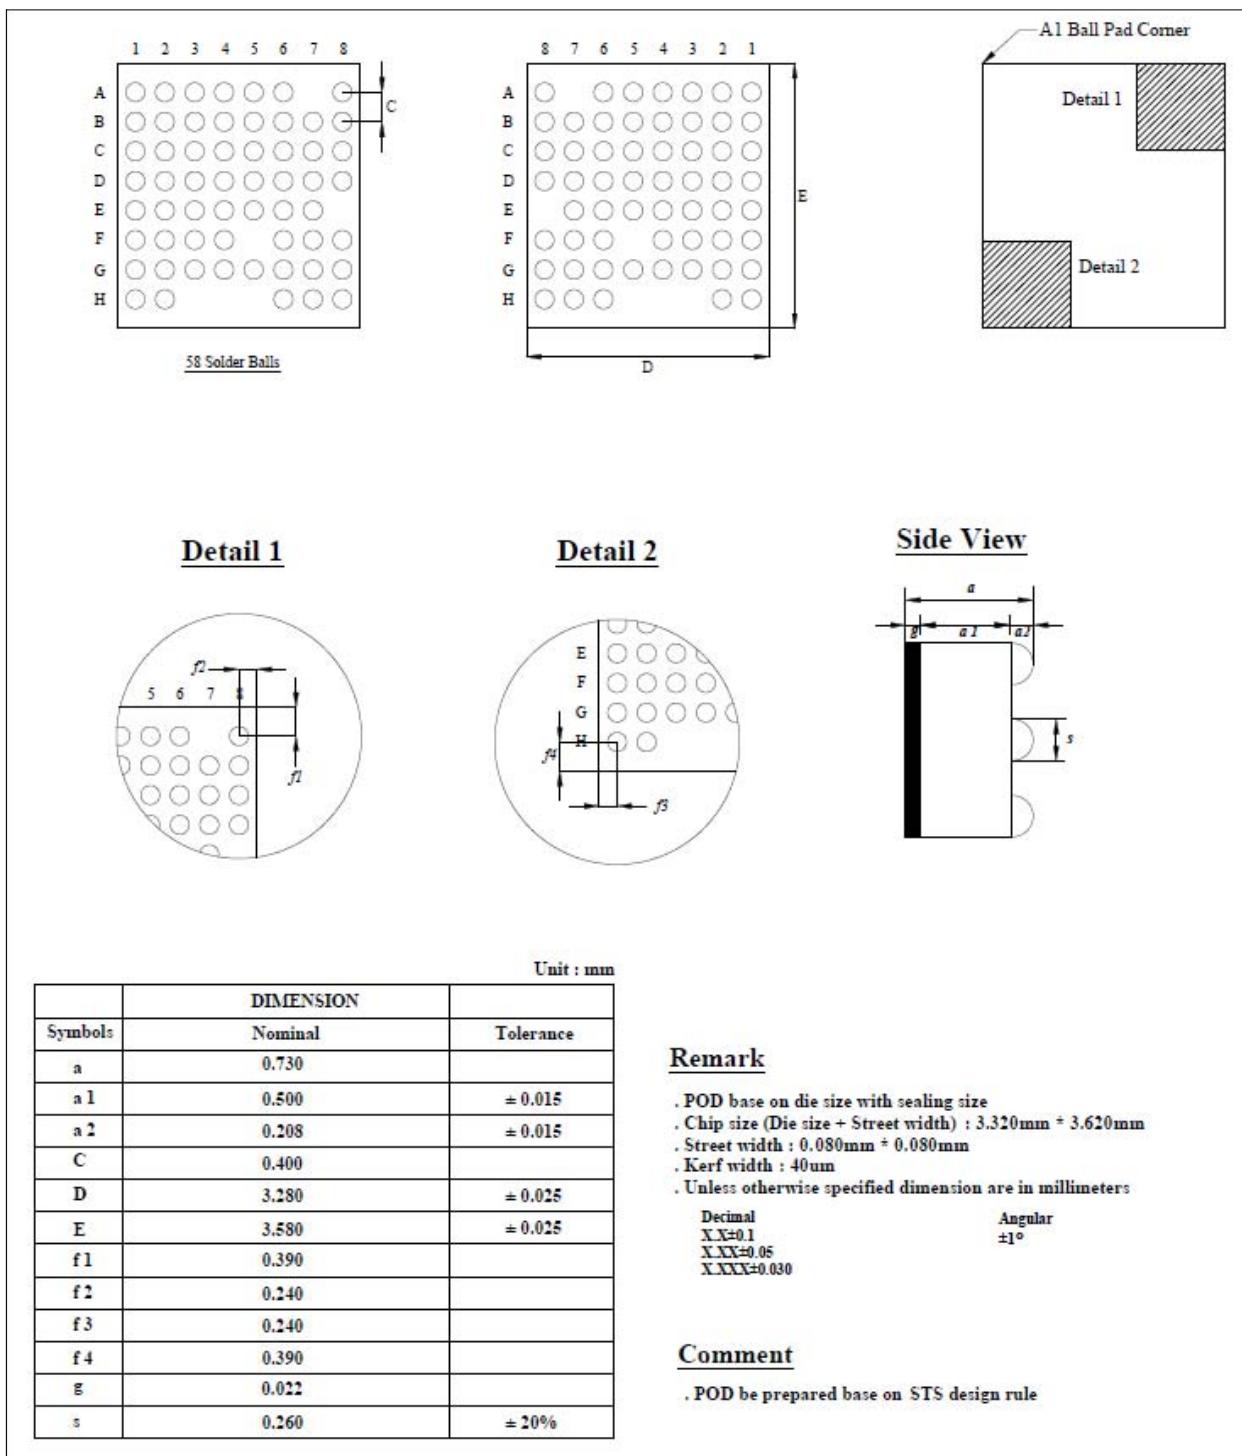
CX20811-15Z Package Dimensions—58-WLCSP
